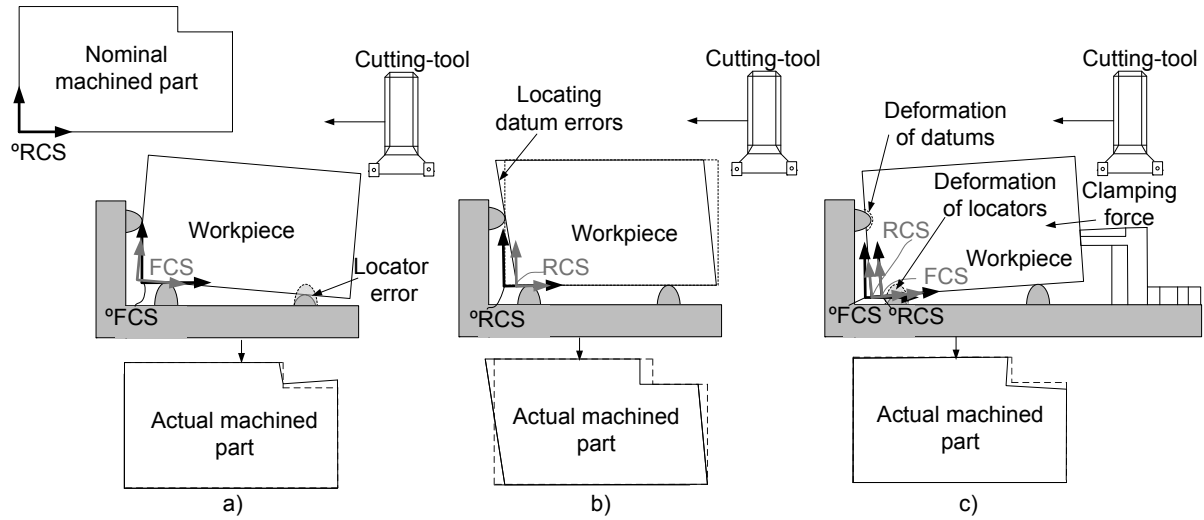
Example of (a) locator/fixture errors, (b) locating datum errors and (c) clamping errors.
